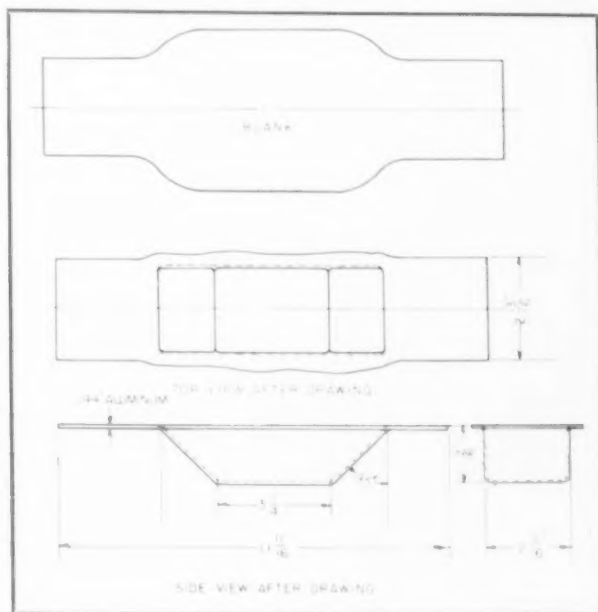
shows the part to be produced. Using conventional drawing methods, the material tended to accumulate on the 45° angle.
